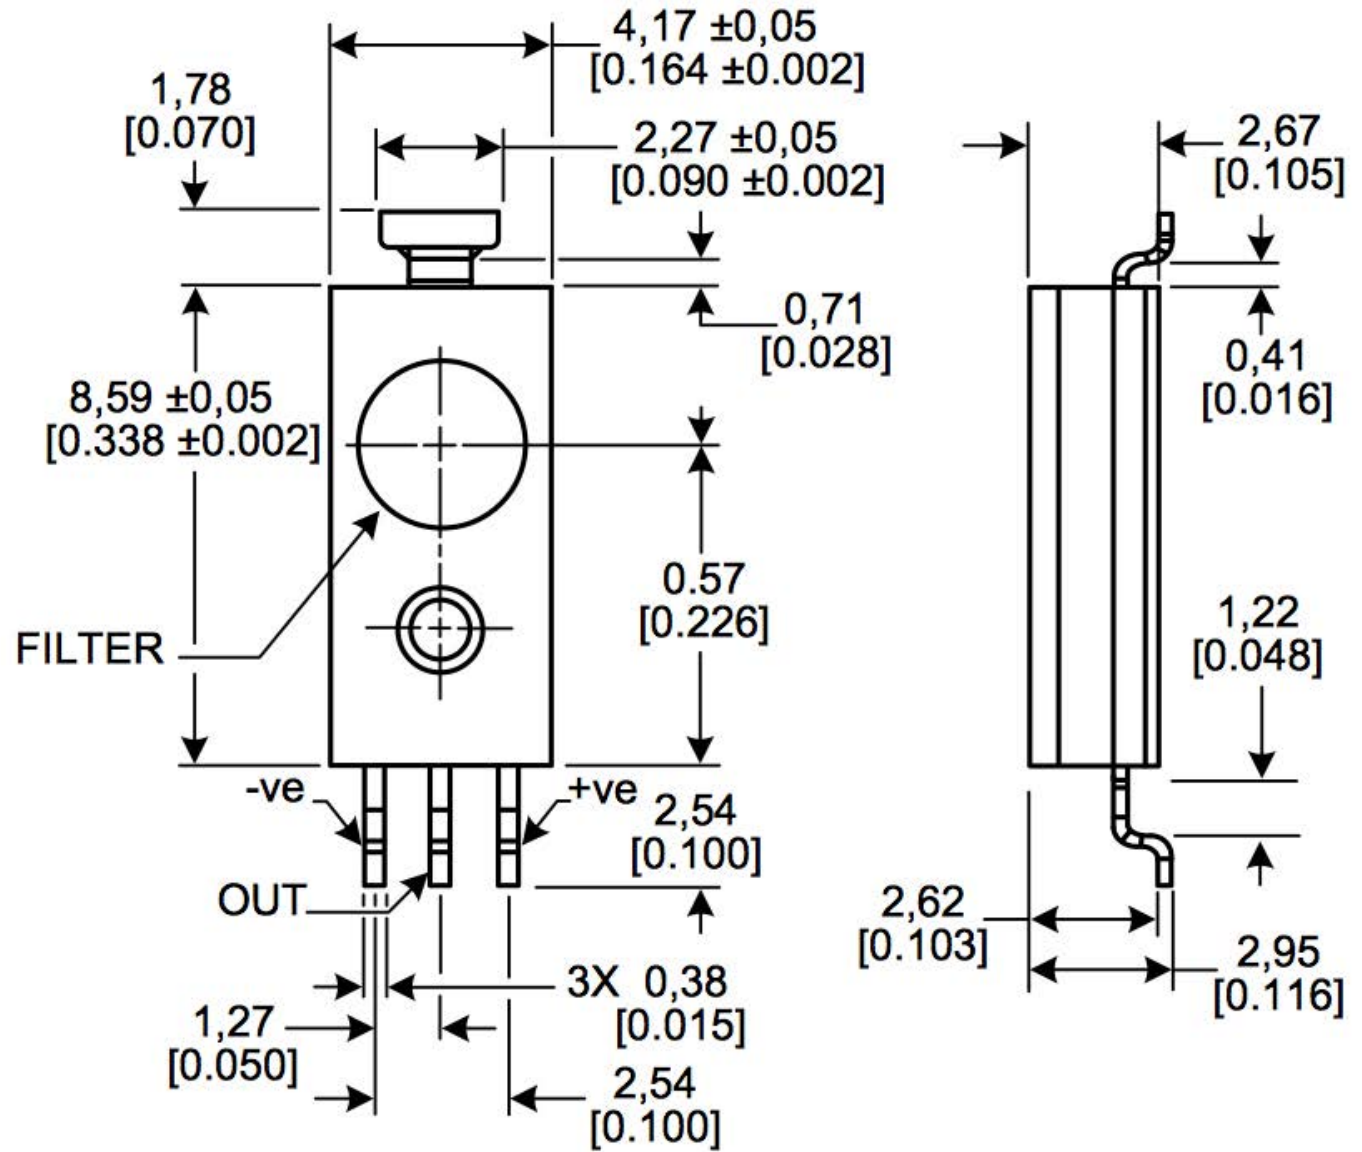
HIH-5031 Mounting Dimensions (For reference only. mm/[in])
